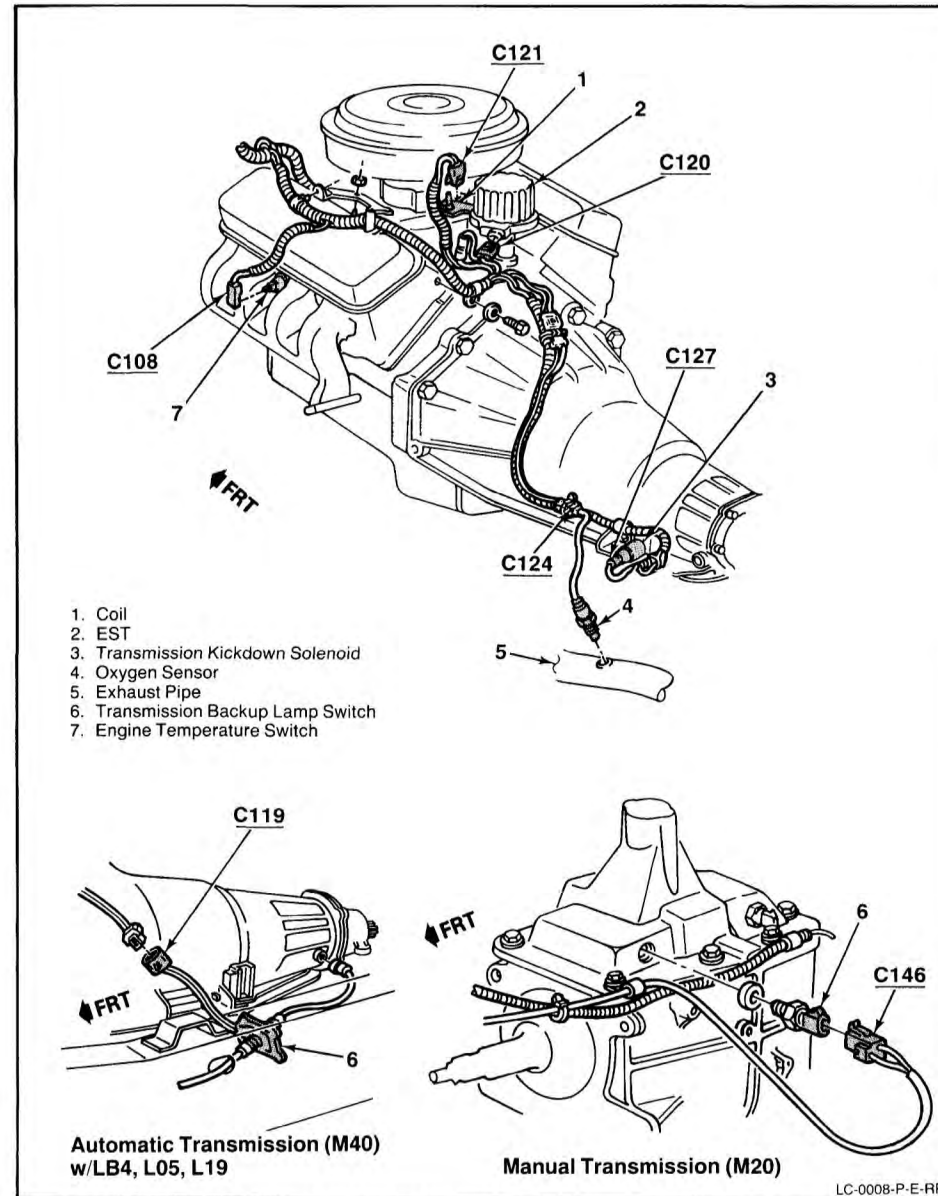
Engine Wiring Harness, LH Side (RPO L19 w/P42)
